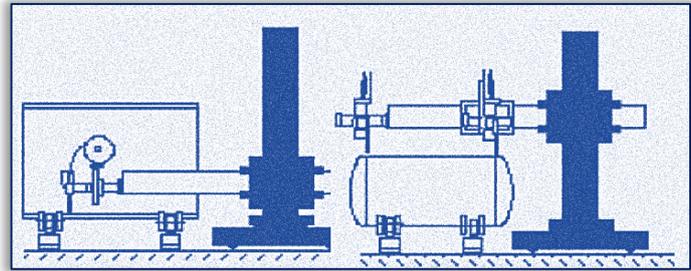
Submerged arc welding of pressure vessels [5]
